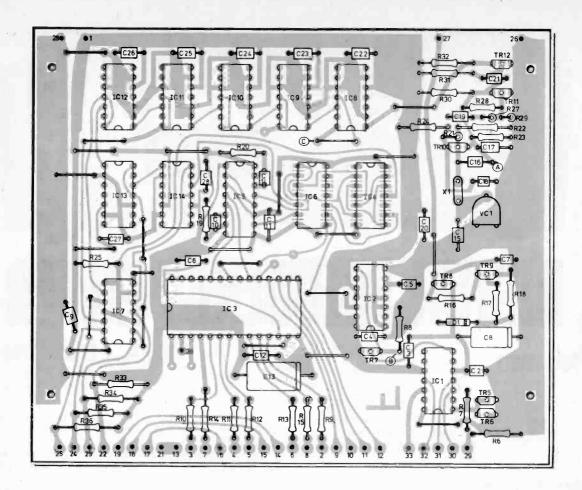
Layout of the components on the main printed circuit board. Note that if the high impedance buffer is used then C1 and transistors TR5 and TR6 are not required. The three signal test points in Fig. 2 are marked as "A", "B" and "C". I.C. sockets should be used especially for IC3 as replacing a faulty i.c. is difficult
